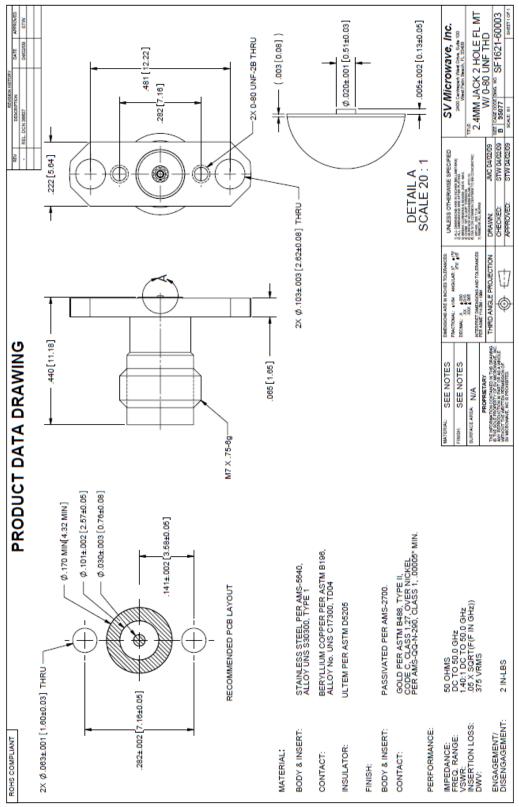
Technical drawing of the SV Microwave 2.4 mm SMA connectors
